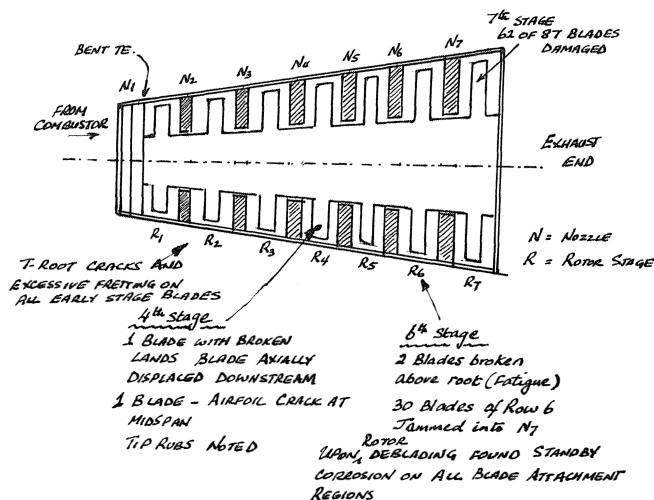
Pictorial Sketch Indicating Extent of Turbine Section Damage.
